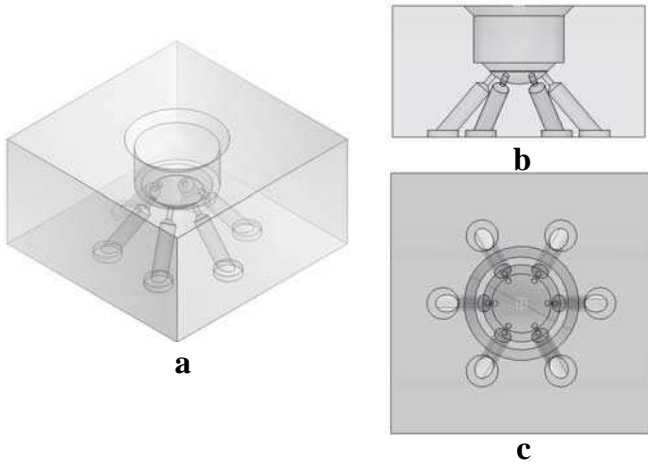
Three-dimensional models of the large-scale 6-hole nozzle; (a) isometric view of Perspex nozzle, (b) front and side view and (c) bottom view.
